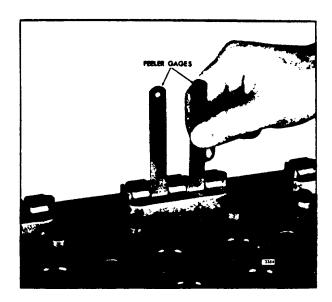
Checking the Clearance Between the Cam Follower Guide and Cam Follower Legs
